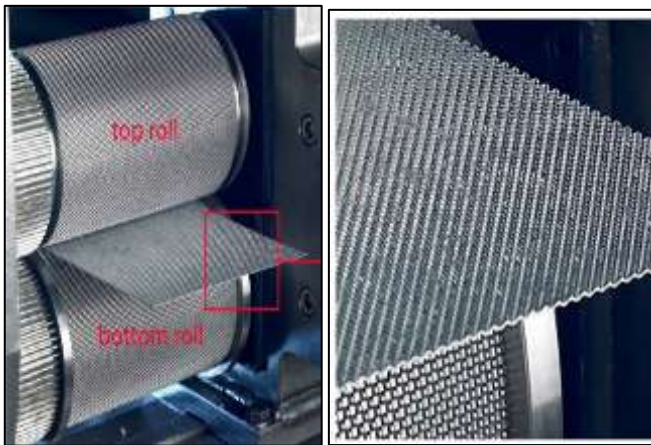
The Ultrasteel® Forming Rollers and Dimpled Steel Sheet
